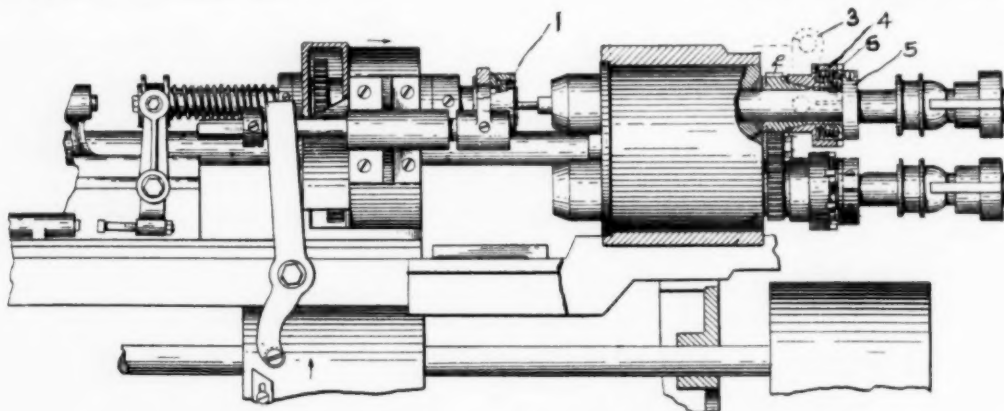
MULTIPLE SPINDLE SCREW MACHINE HAVING MEANS FOR AUTOMATICALLY STOPPING THE SPINDLE.
